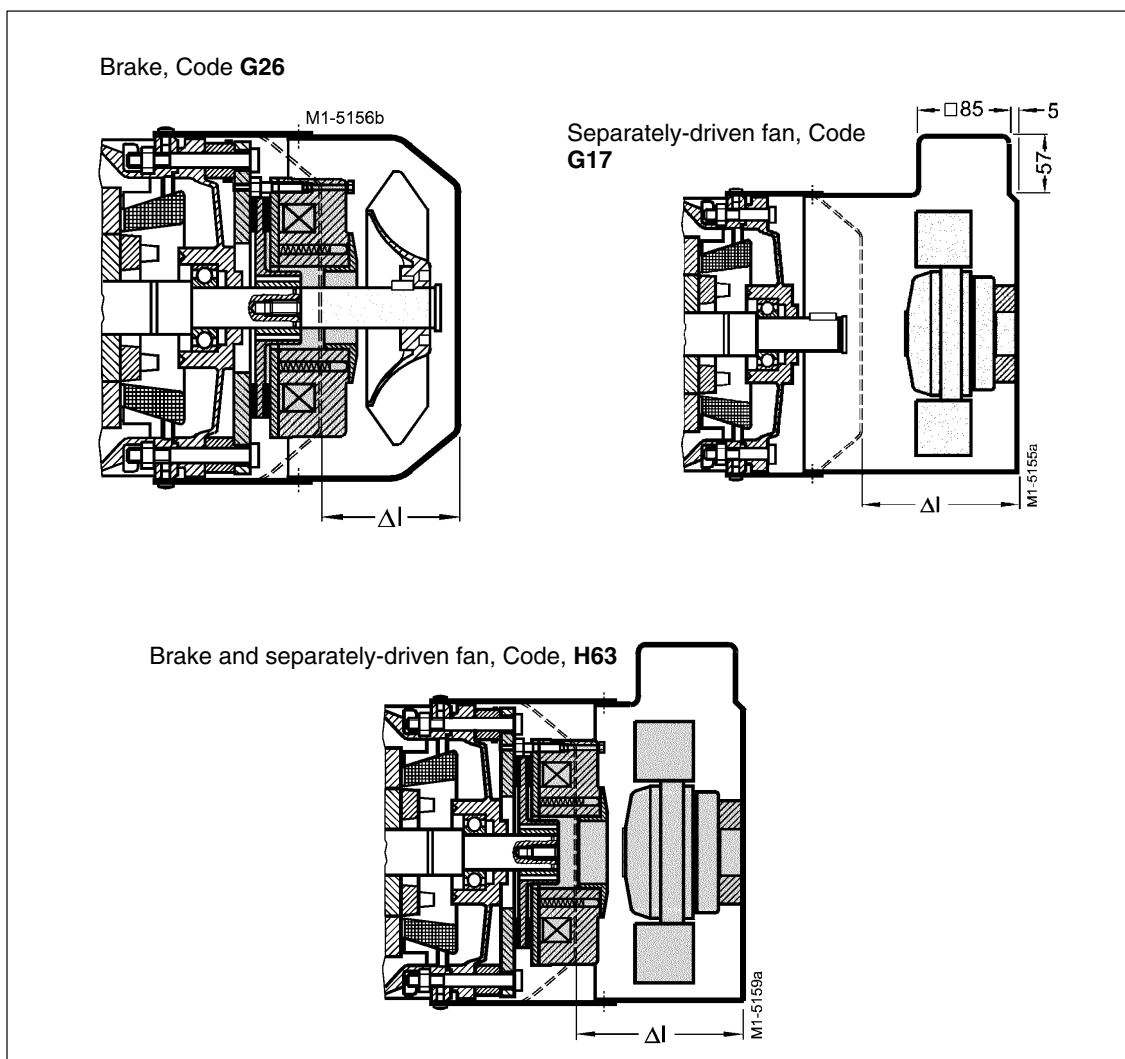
Dimensions for Δl (also refer to Table 3-9)
